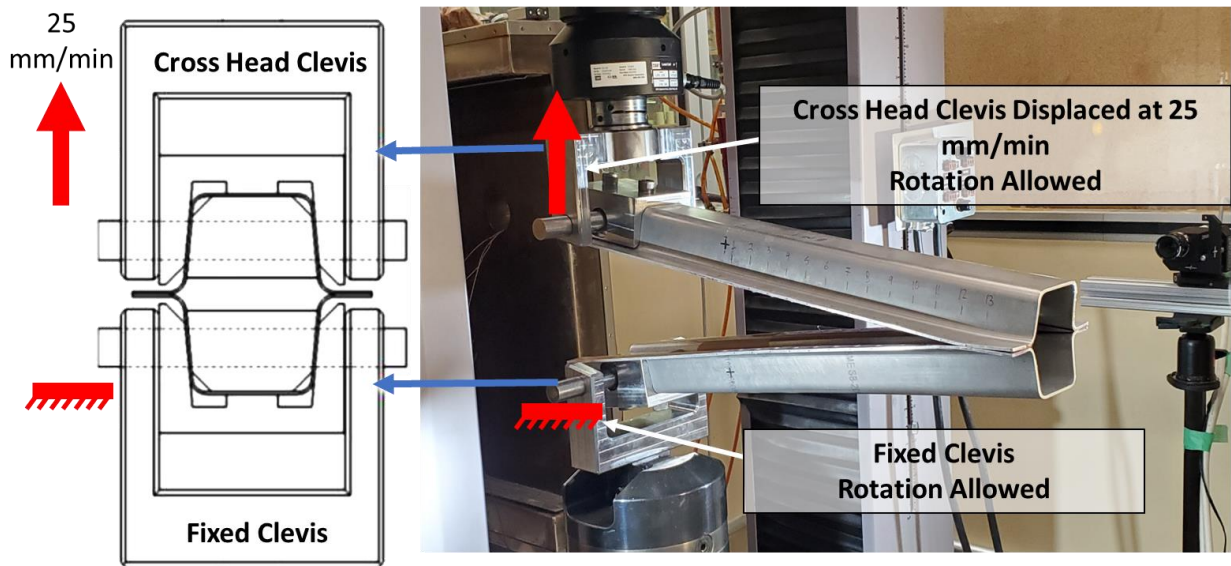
The Caiman test used a pin joint to progressively fail the joining method and separate the hat sections.
